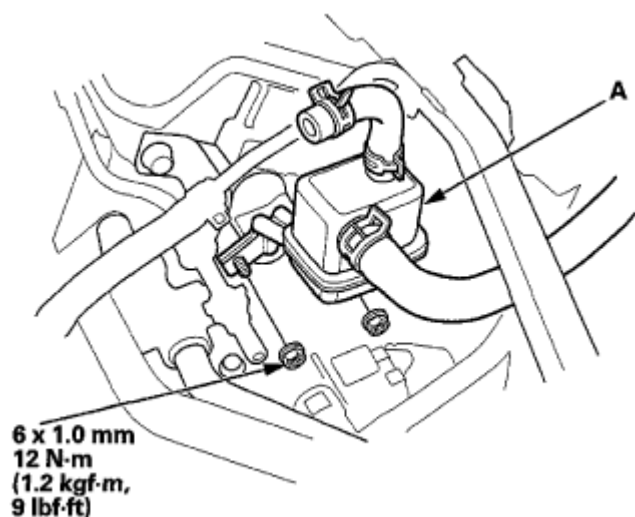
Identifying EVAP Canister Purge Joint With Mounting Bolts Torque Specification
